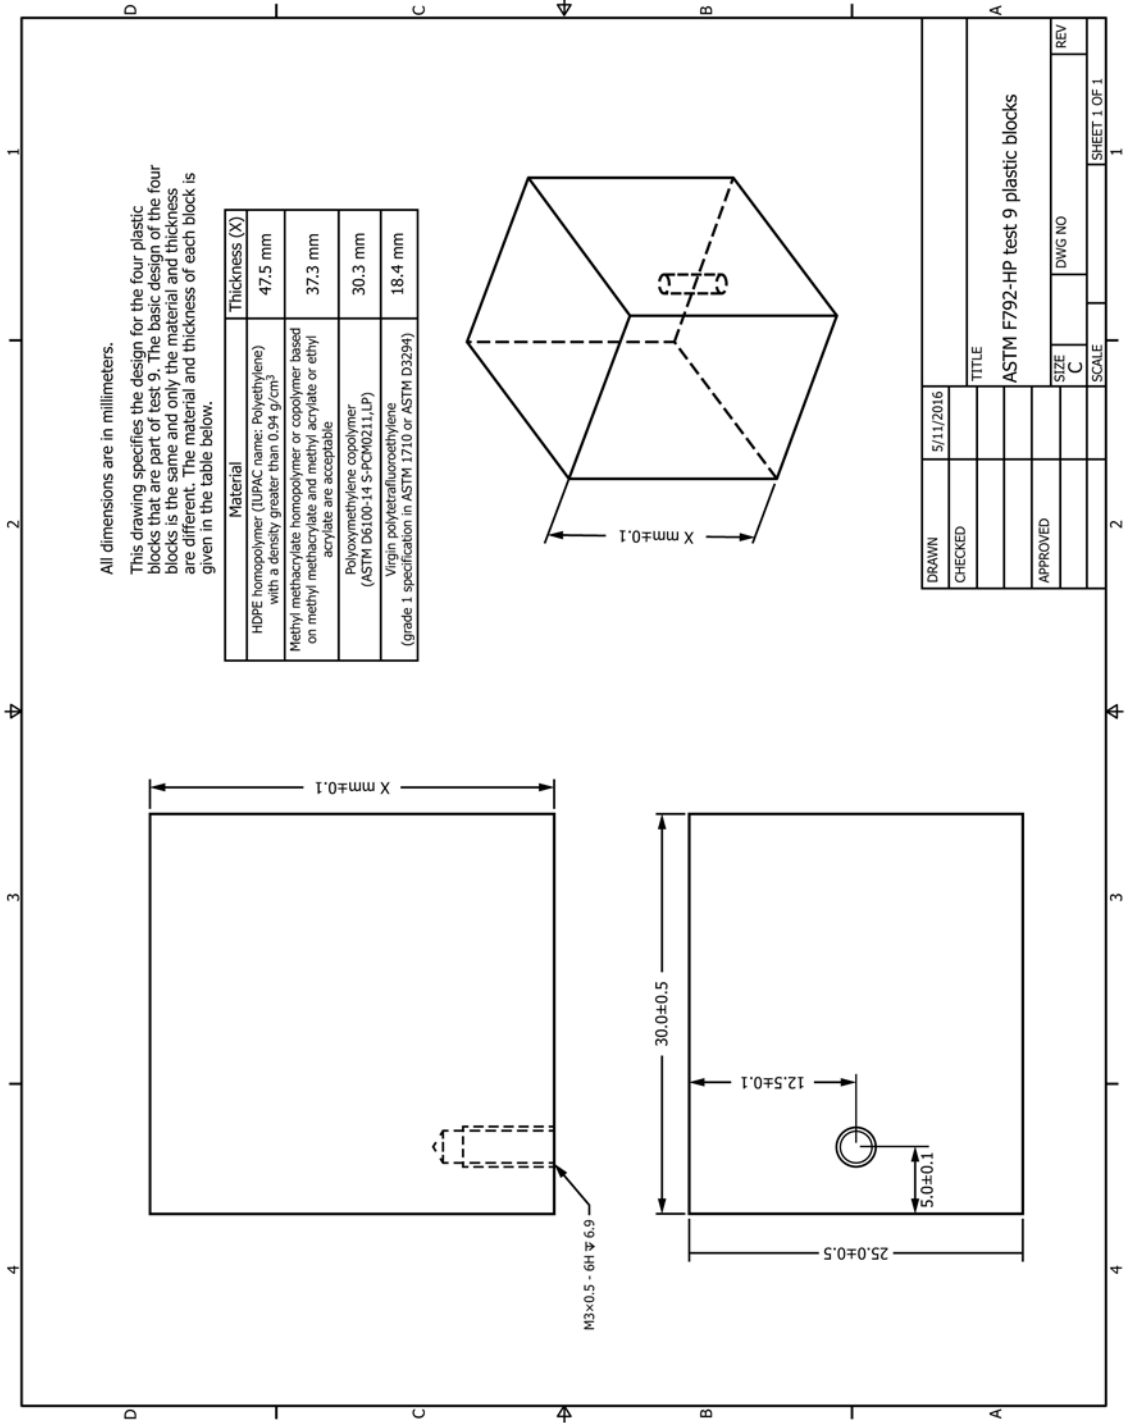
Practice F792 – HP Mechanical Drawing
